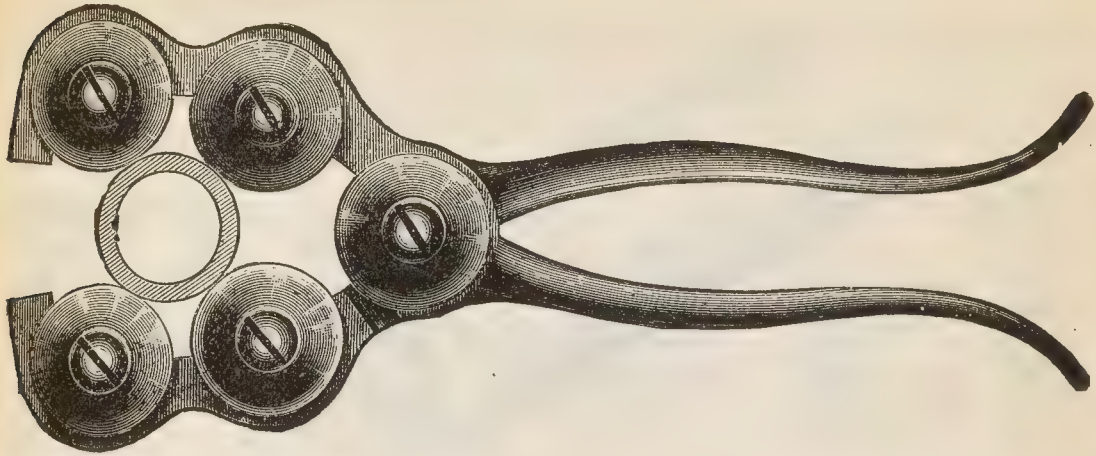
,422.—Wheel lead pipe cutter. Handles and frame are malleable iron, wheels of steel.
